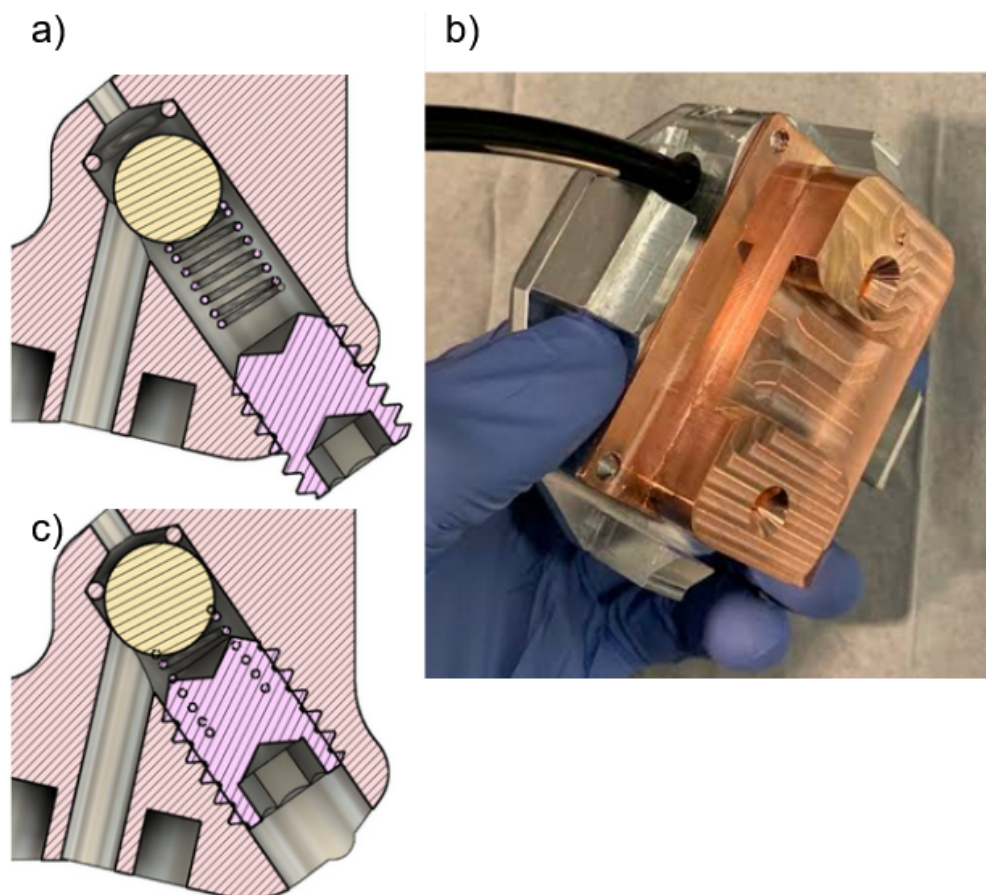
The 2way VTM valve system consists of a steel ball sealing onto an O-ring with an additional evacuation channel to allow a gate-valve operation mode. The ball is compressed onto the O-ring with a spring, which is pre-tensioned by a set screw. Evacuation occurs through a separate evacuation channel, not through the set screw as in the Thermo Fisher design.
